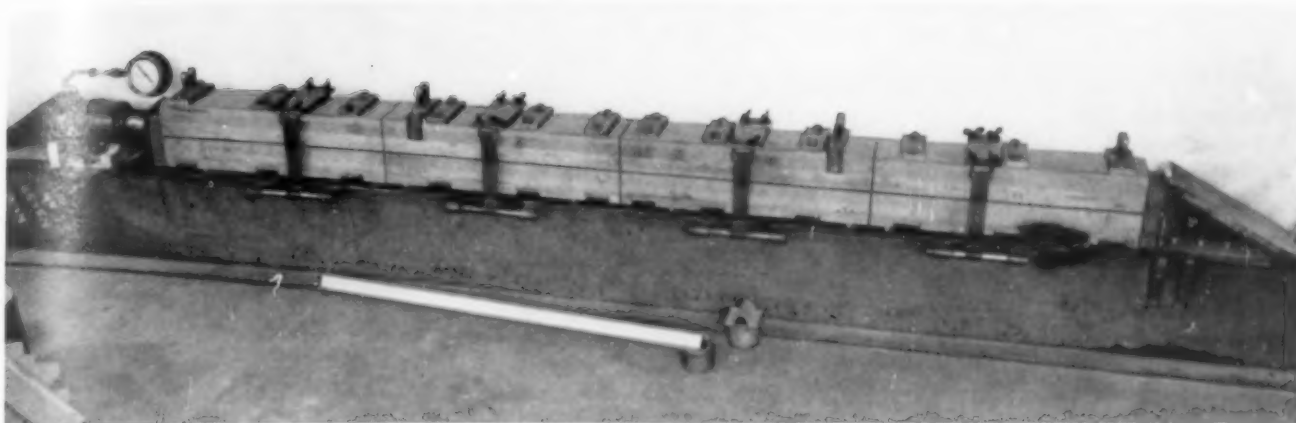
Fixture for Pre-Compressing Long Extrusions. Each supporting block is movable end-wise between hold-down and supporting rollers
